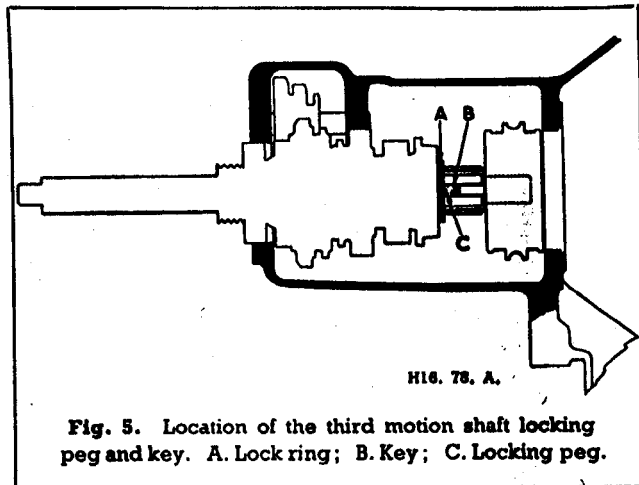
Location of the third motion shaft locking peg and key. A. Lock ring; B. Key; C. Locking peg.
